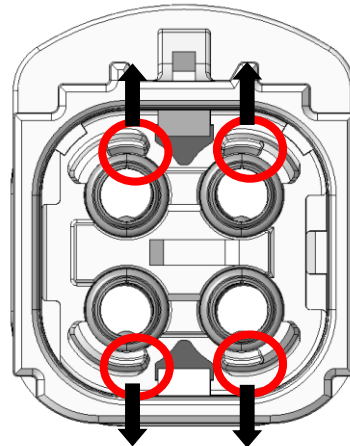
DEFLECTION OF THE PRIMARY LOCKING LATCHES
